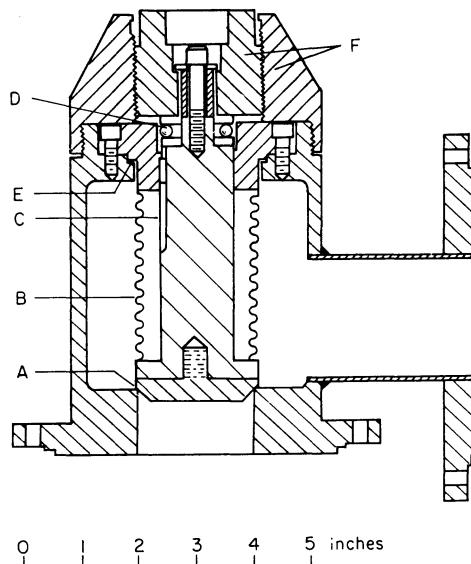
Bellows sealed, ultra-high vacuum valve. After Lange⁷³⁶ (*Courtesy of The American Institute of Physics*): (a) Copper nose; (b) bellows; (c) guide; (d) ball bearing; (e) gold wire seal; (f) driving mechanism
